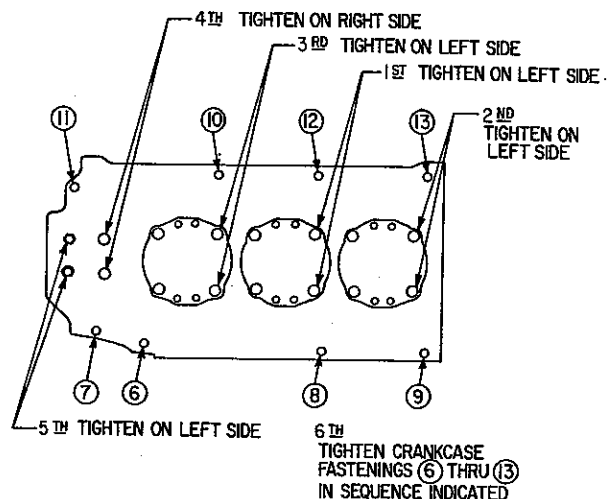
Crankcase Tightening Sequence (Six Cylinder Engines)
